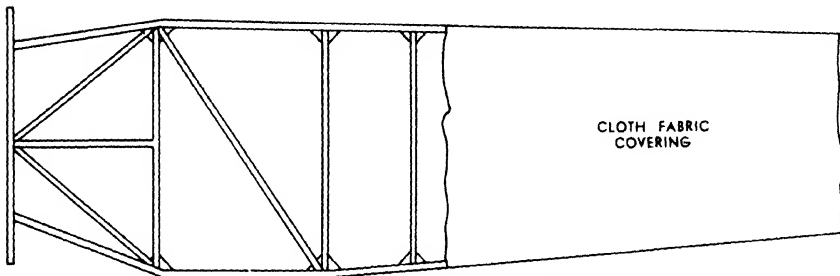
B. TRUSS FUSELAGE CONSTRUCTION.
